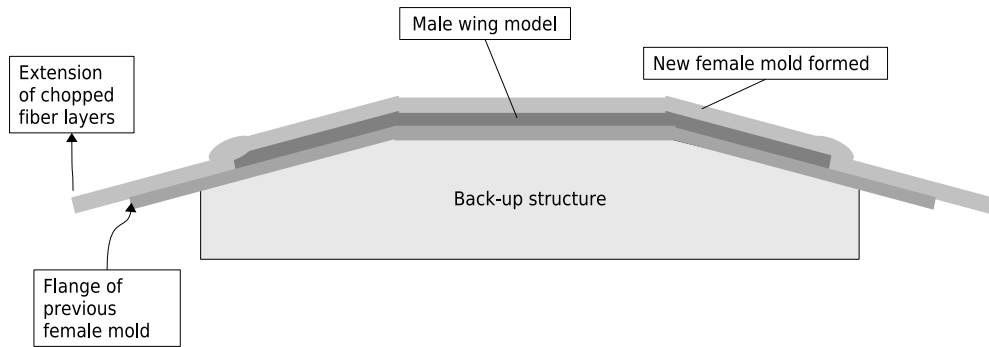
Front view of the mold assembly after the built-up of the wall of the female mold.
